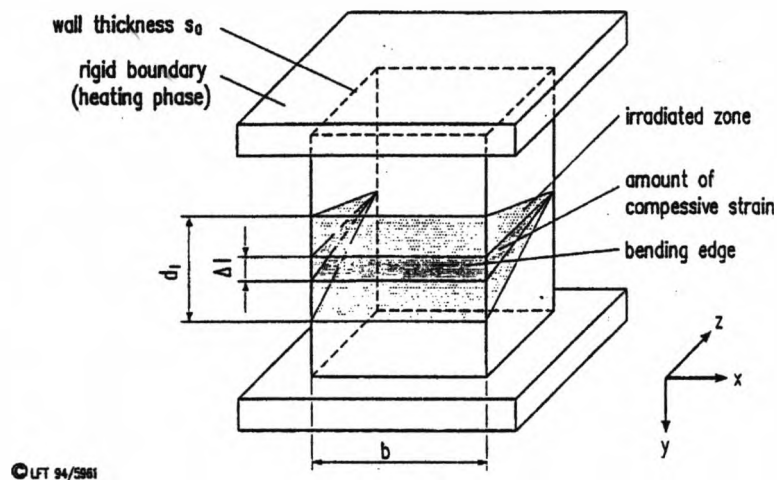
Model for extrusion bending using the upsetting mechanism⁸
